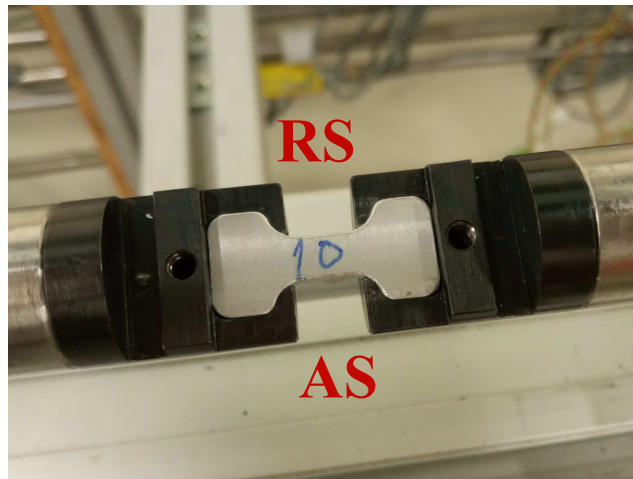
Butt joint specimen with axial welding placement on the grips, retreating-advancing side
